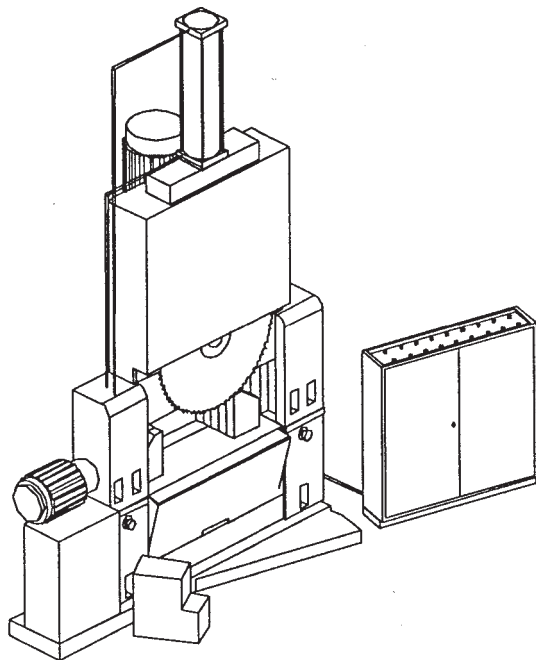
Circular sawing machine with powered feed — Pivoting head type
